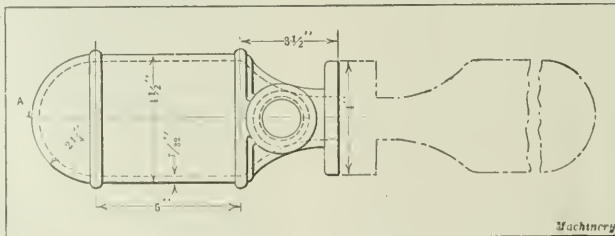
Piston Pump Air Chamber and Core used in molding the Casting
